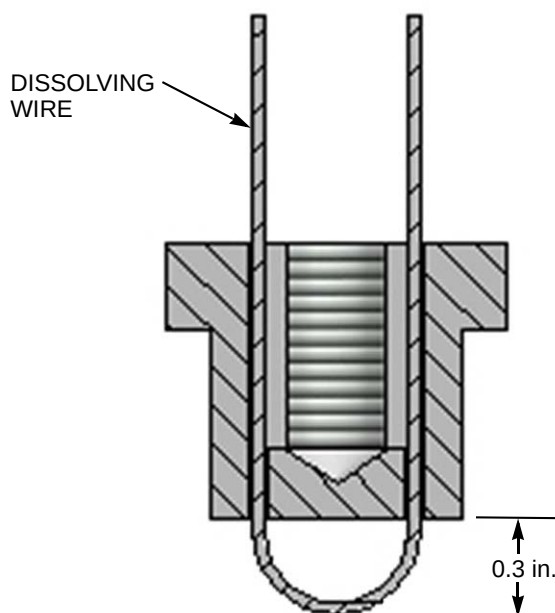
Dissolving Wire Inserted in Burnwire Bolt
